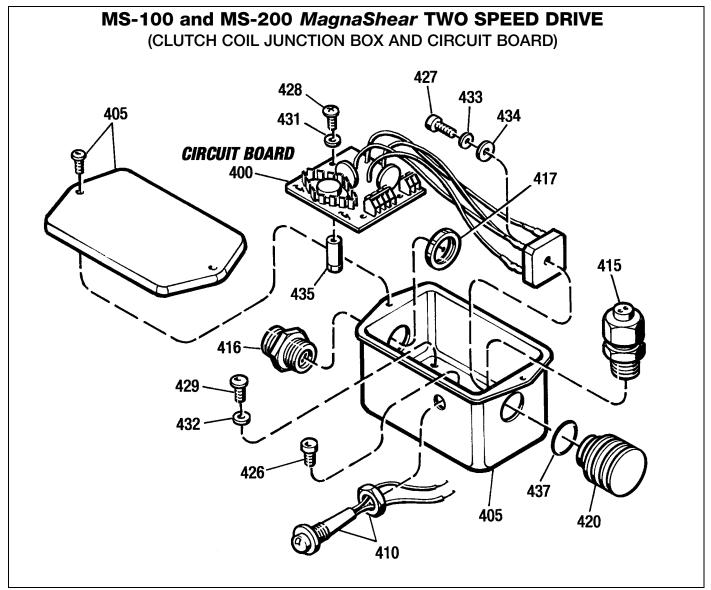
Repair Parts - Clutch Coil Junction Box and Circuit Board
